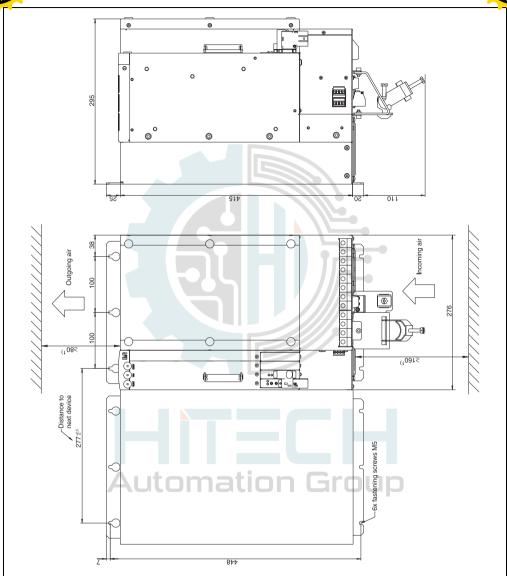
Dimensional diagram and installation dimensions for ACOPOS 1640
